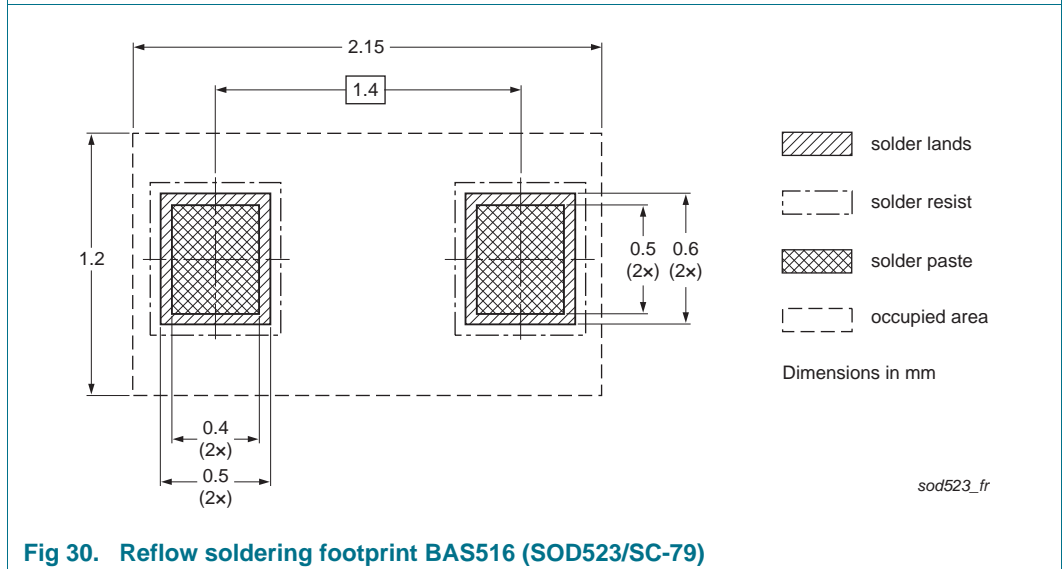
Reflow soldering footprint BAS516 (SOD523/SC-79)
